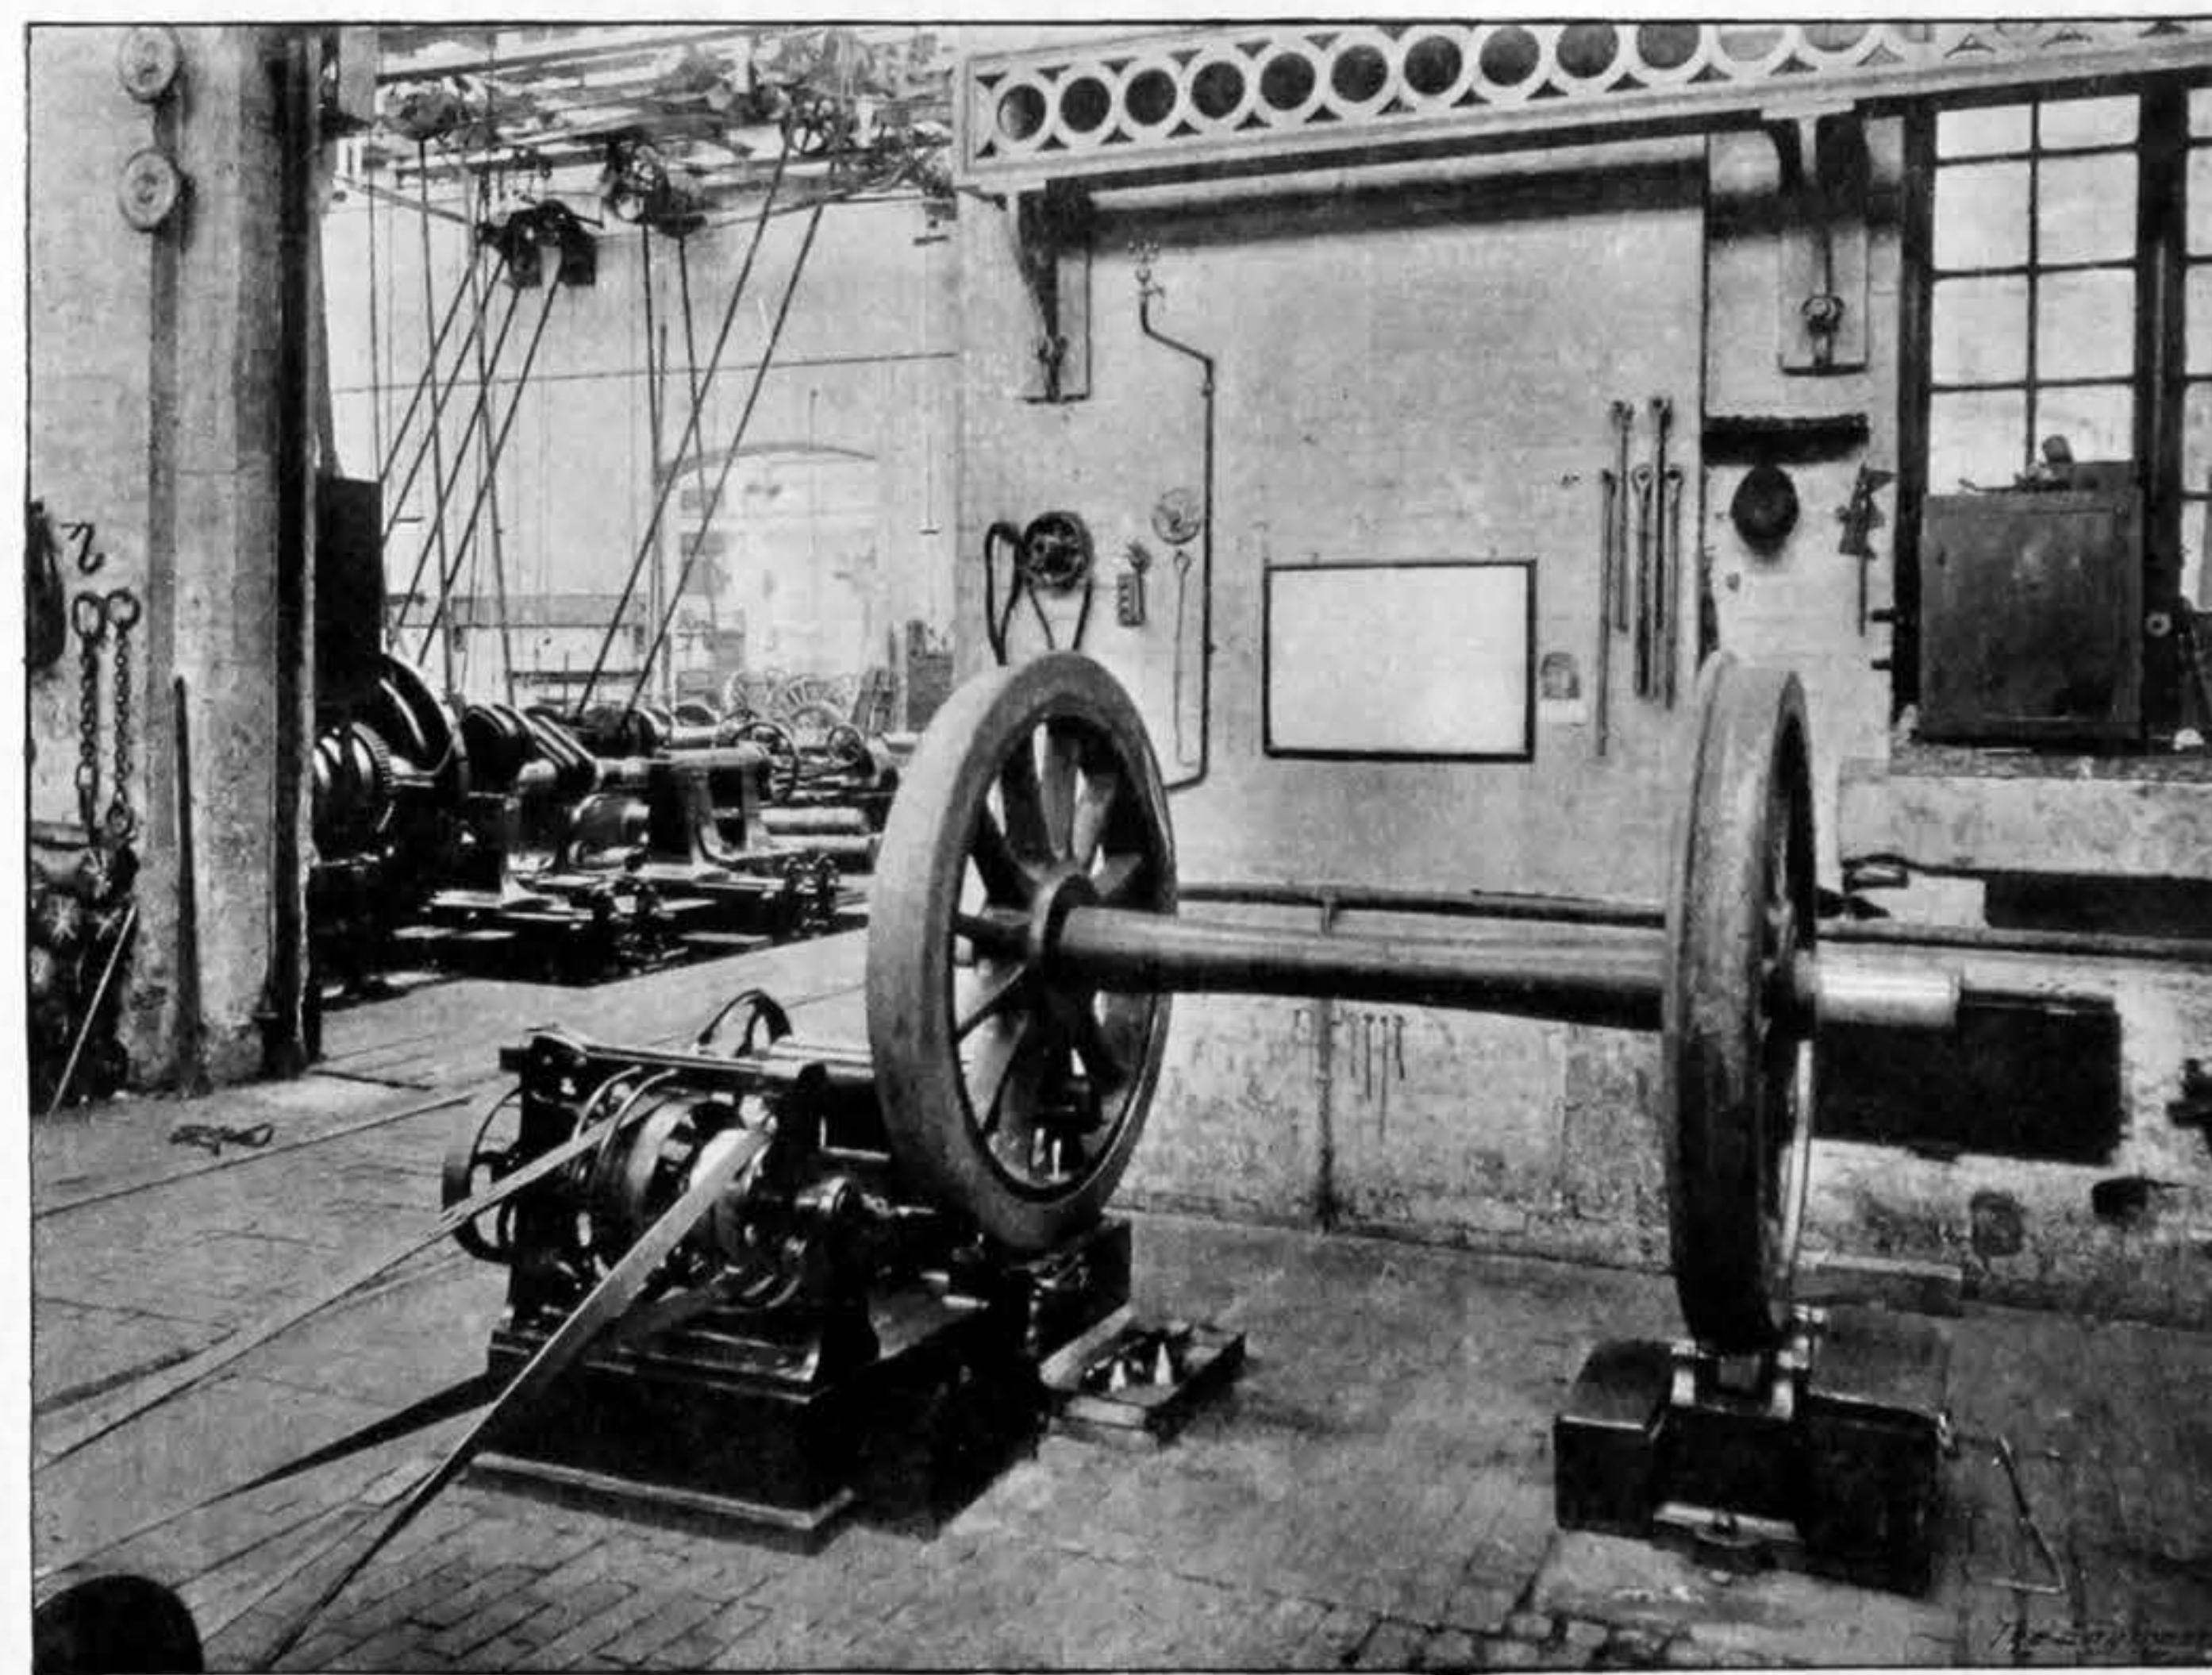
WHEEL RIM AND TIRE DRILLING AND TAPPING MACHINE
